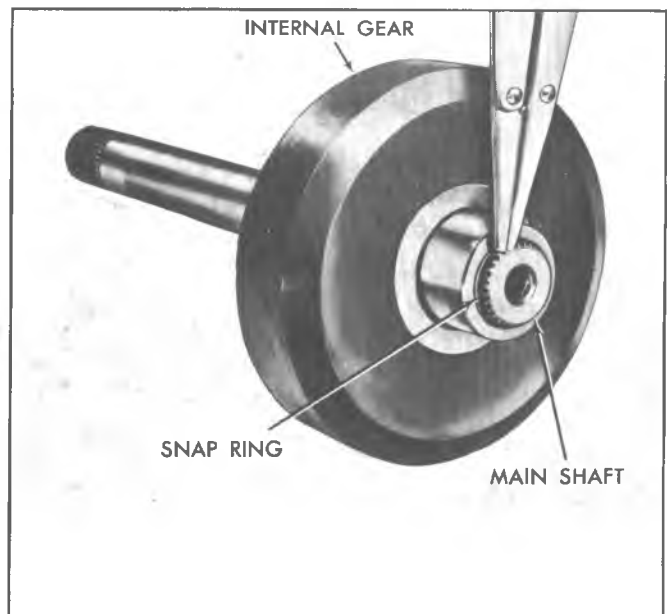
A-142C--Installing Rear Internal Gear Snap Ring
